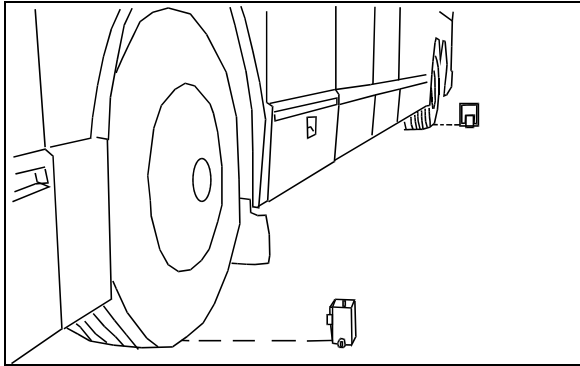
INSTALLING CALIBRATION FIXTURES 06497
